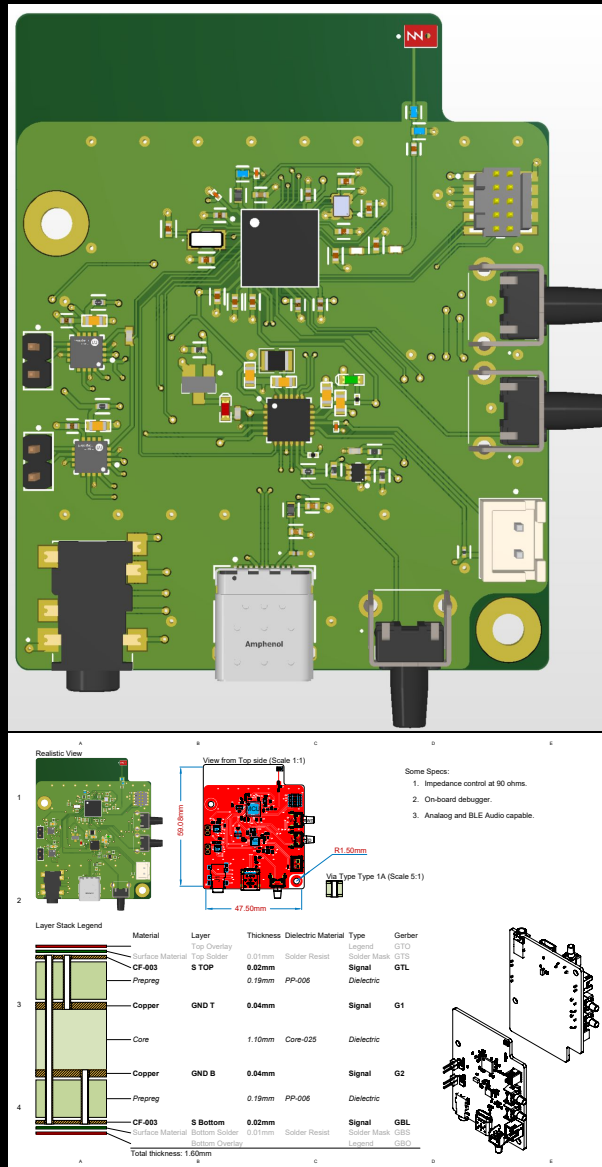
Top: Figure depicting the top component layer of the Audio Board 2. Bottom: PCB documentation blueprint for the Audio Board 2, depicting dimensions, notes and layer stack.
